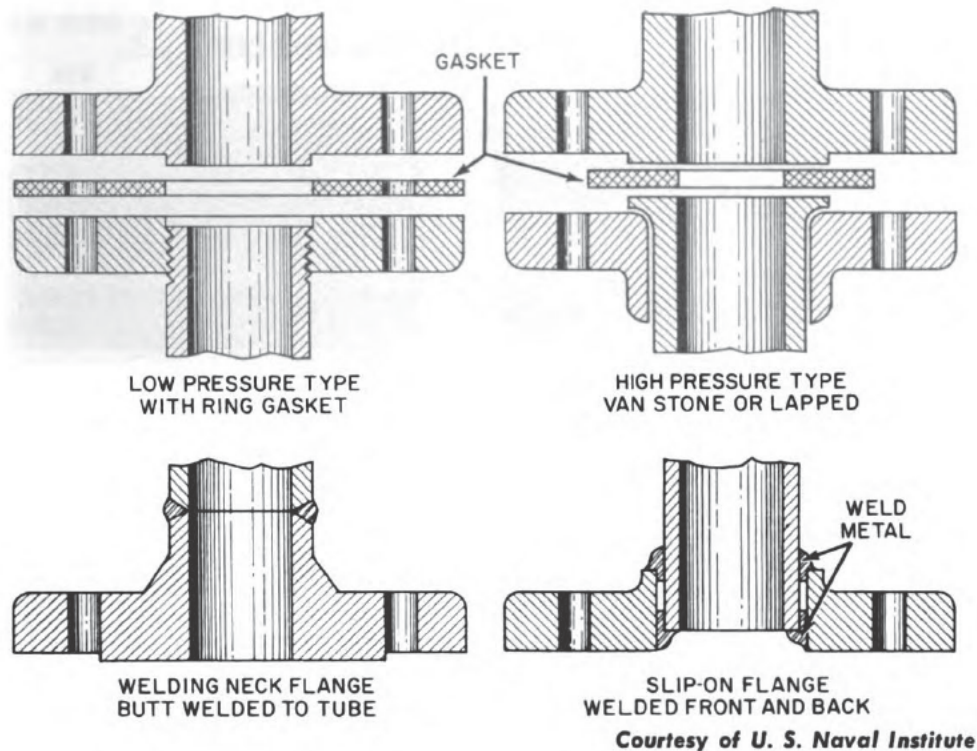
Bolted flange piping joints—illustrating four different types.
